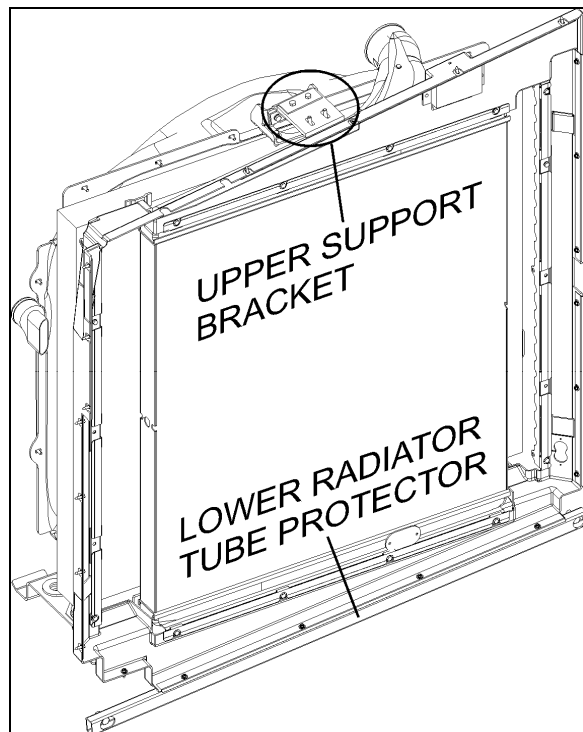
UPPER SUPPORT BRACKET & TUBE PROTECTOR
